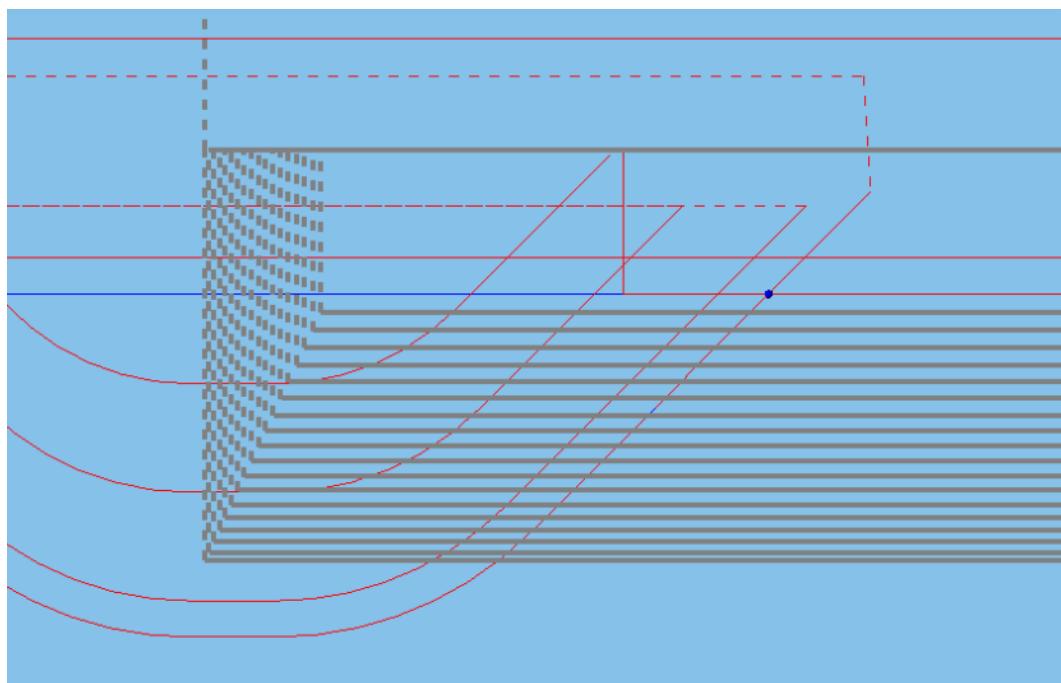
Tool trajectories in Esprit CAM for modified flank infeed penetration method during external thread turning.
